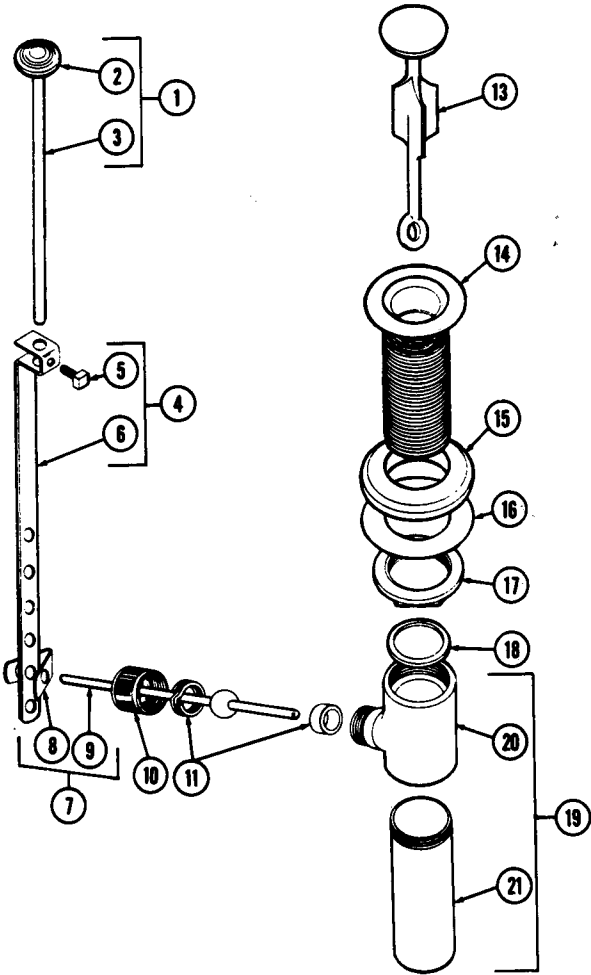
POP-UP DRAIN ASSEMBLY (OLD STYLE).
